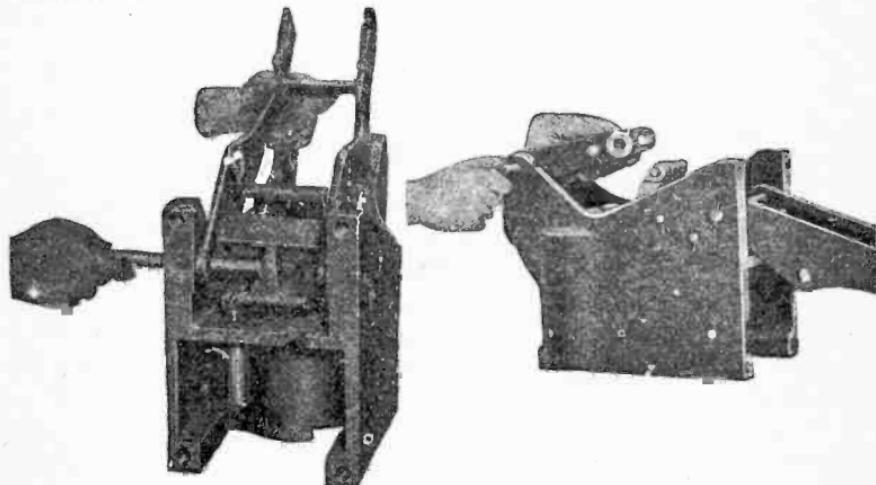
,158.—*How to assemble an air circuit breaker 13. Attaching the brush support to solenoid magnet frame.
